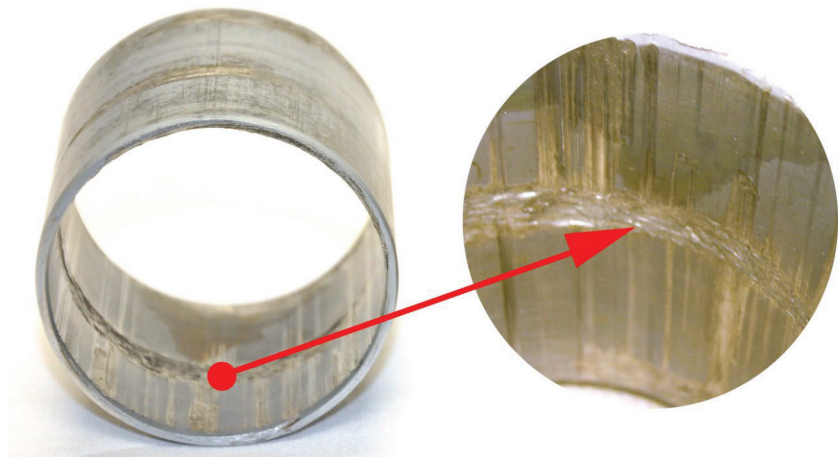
Metal Valve Stem Bearing Failure
